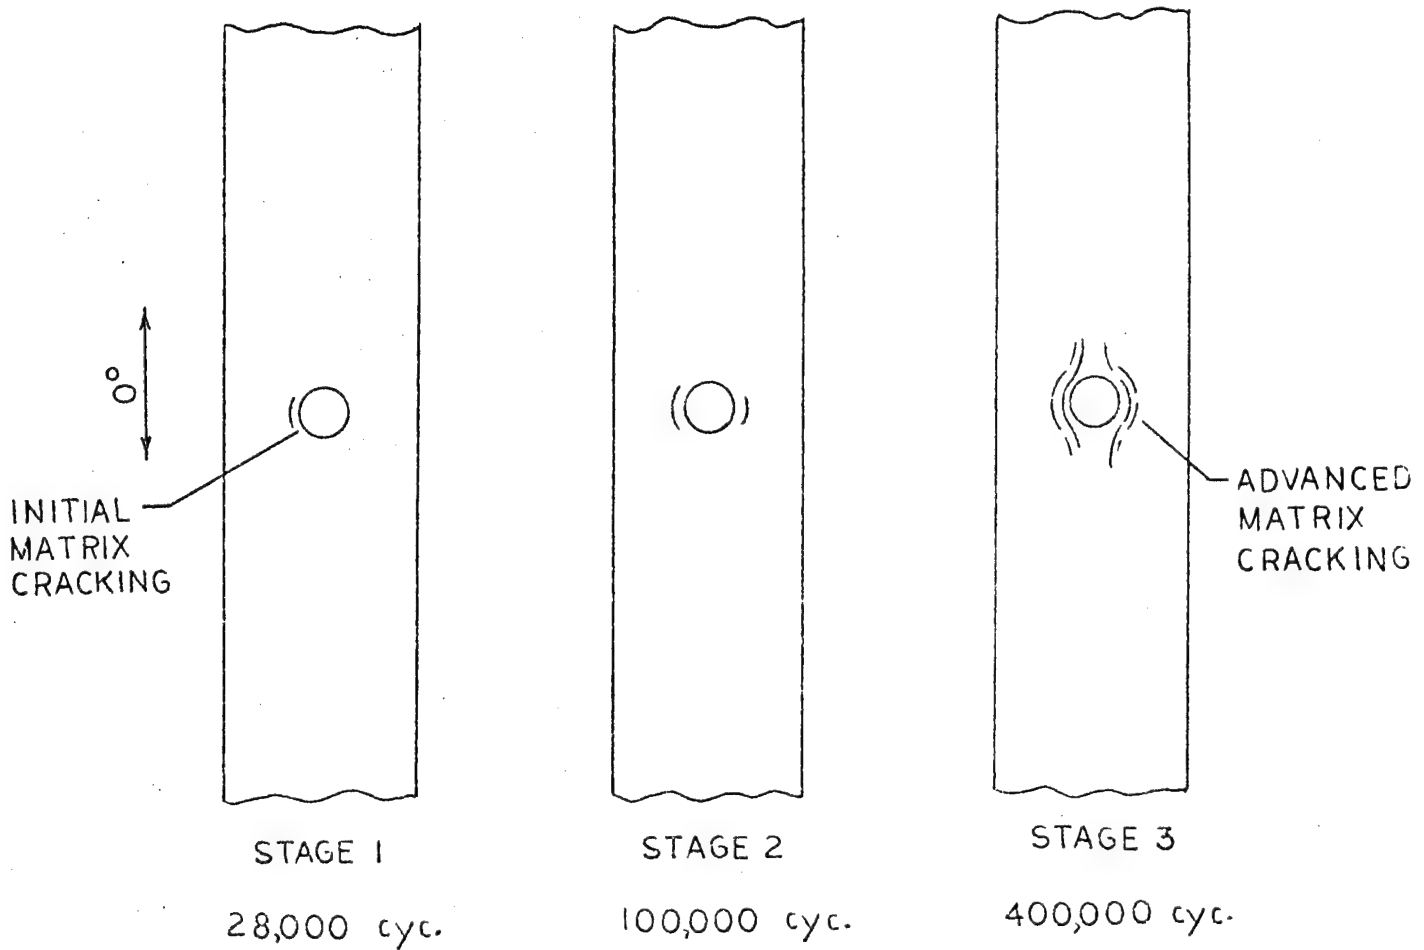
Typical Fatigue Failure Mode - Formed Hole Specimen
